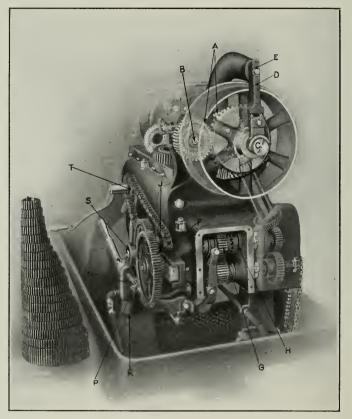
Spindle and Cam Shaft Change Gear and Driving Mechanism
